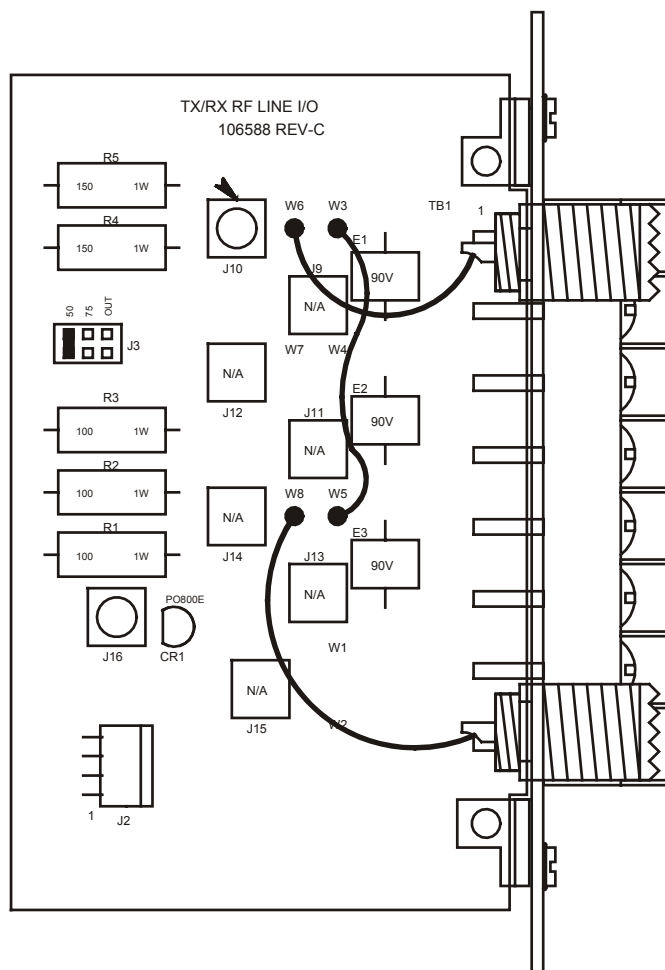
Controls and indicators, and component locator drawing, RFL Line I/O module
